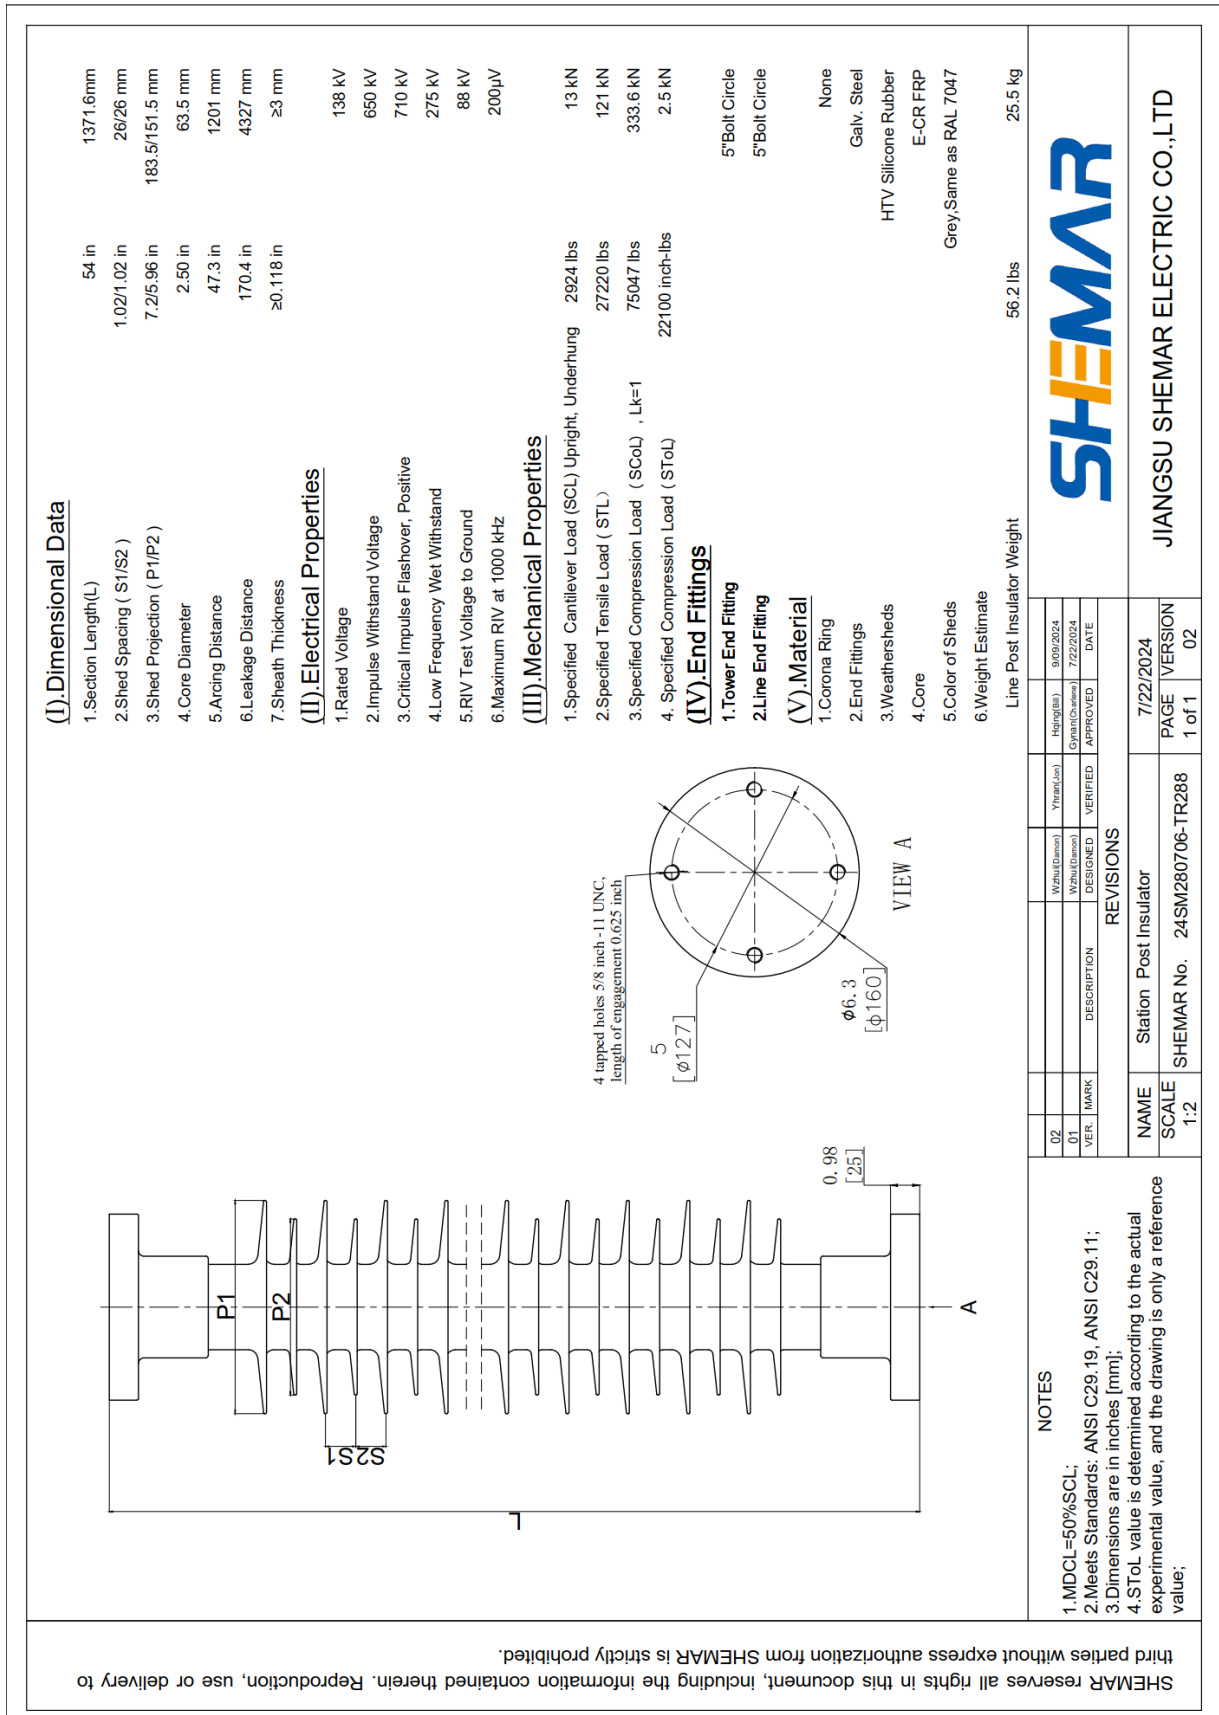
Station post insulator type TR-288, drawing No. 24SM280706-TR288
